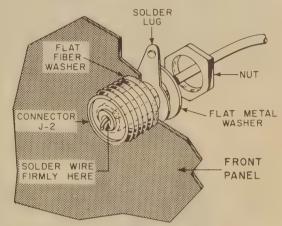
HOW TO MOUNT THE CHASSIS CONNECTOR
